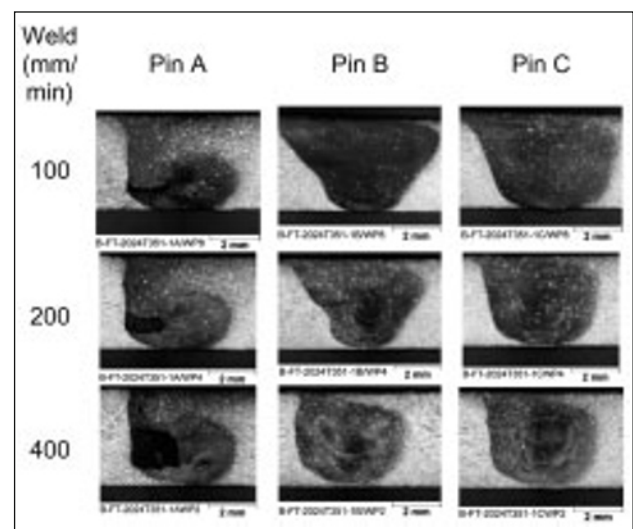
Weld macrographs produced using tool pins A, B and C in conjunction with shoulder 1 for 3 different weld travel speeds
